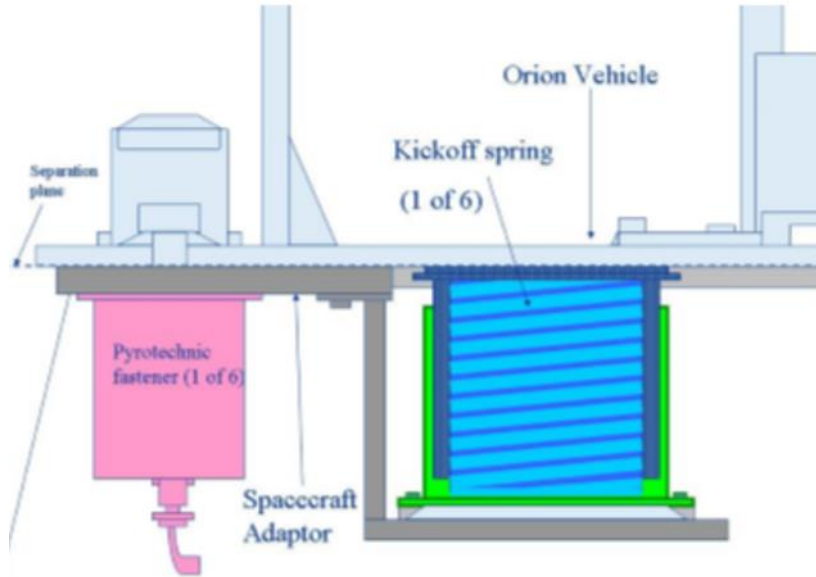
Compressible Helical Spring in a Separation Mechanism[10]
